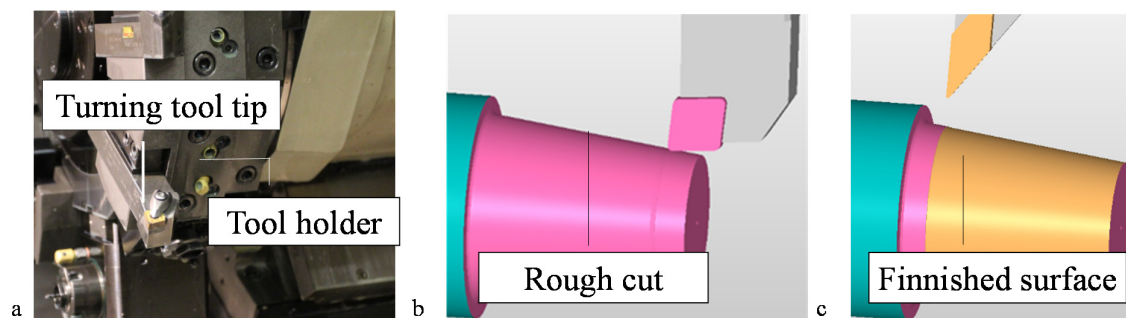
Illustration of outside turning (a) toolset-up (b) shaping of outside geometry (c) finishing of outside surface.
